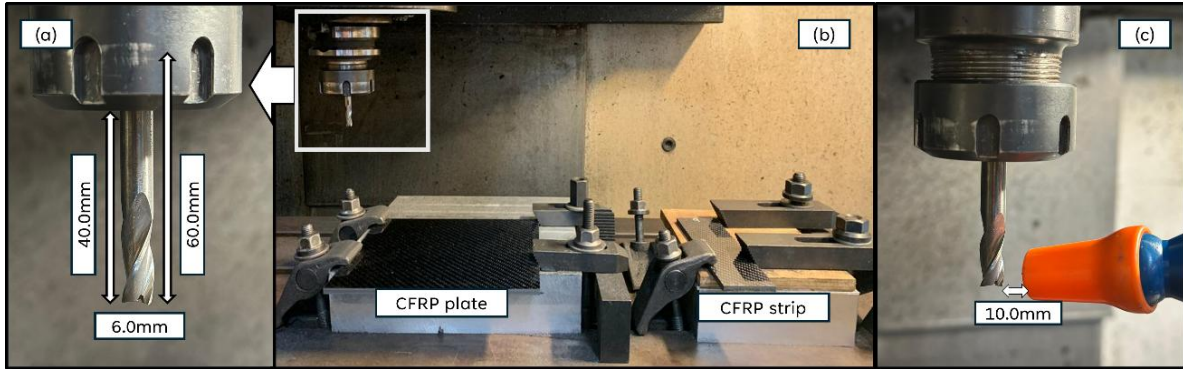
(a) The cutting tool that employed in this study, (b) the experimental setup in milling the CFRP and (c) the distance of the cold air gun nozzle from the cutting tool for chilled air cutting conditions
